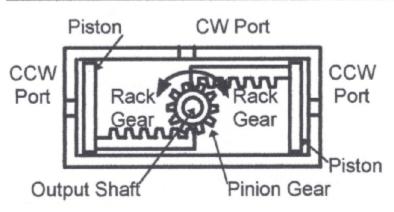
Rack-and-pinion rotary actuator with sealed output shaft.
